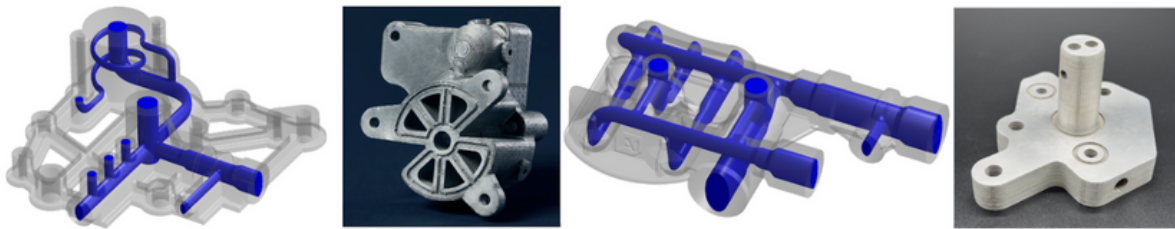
Examples of manifolds and pump housings developed and fabricated with Stack Forging to reduce lead time. Components of this complexity typically require multi-piece tooling, casting, impregnation, and machining.
